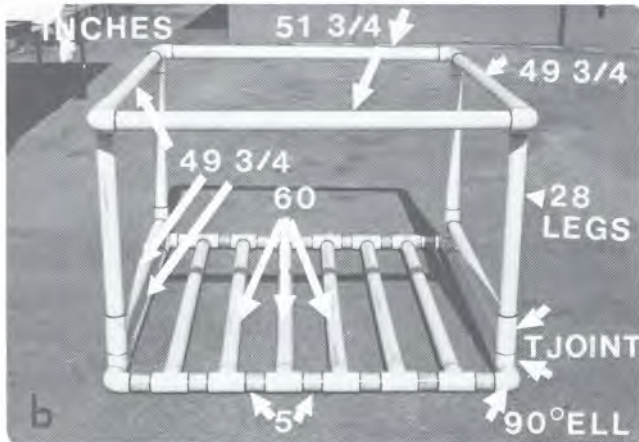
An on-site storage shed constructed from PVC pipe and a plastic cover.
